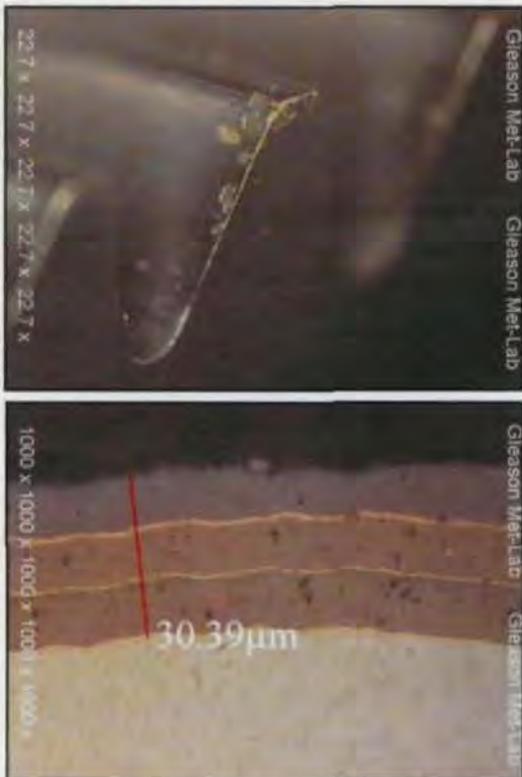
Coating fractures can contribute to poor hob performance. Multiple coating layers chipped on the outer surface (top), while the lower coating layers have remained intact (bottom).
